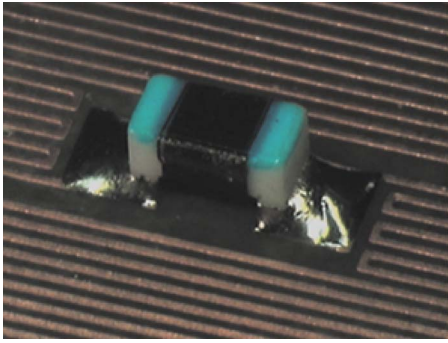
(Color online) Lumped-element inductor that was hand soldered onto the ENG board
